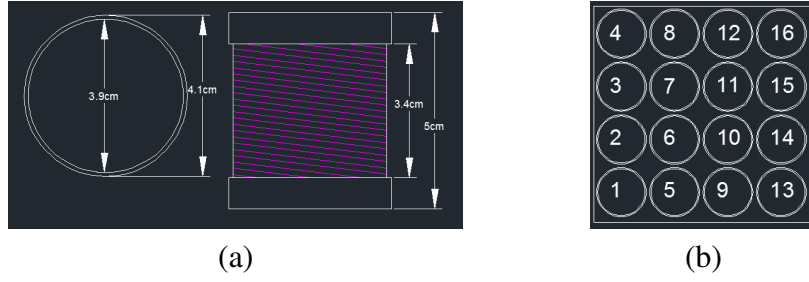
(a) coil dimensions, (b) coil sequence.
